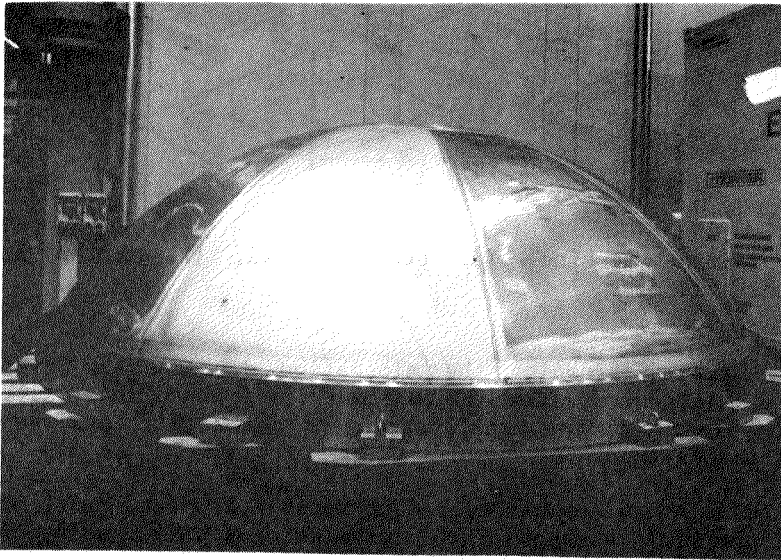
Welded tank bulkhead with peen formed segments
